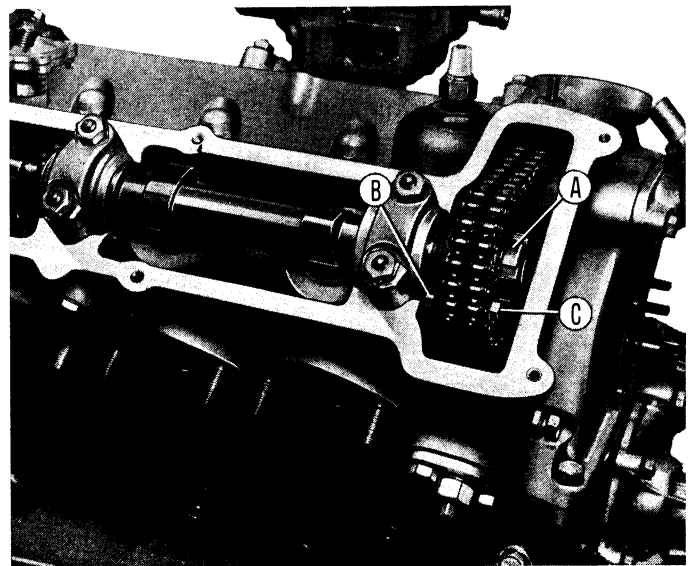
Detail of camshaft drive sprocket mounting on engine 118 B.000.
